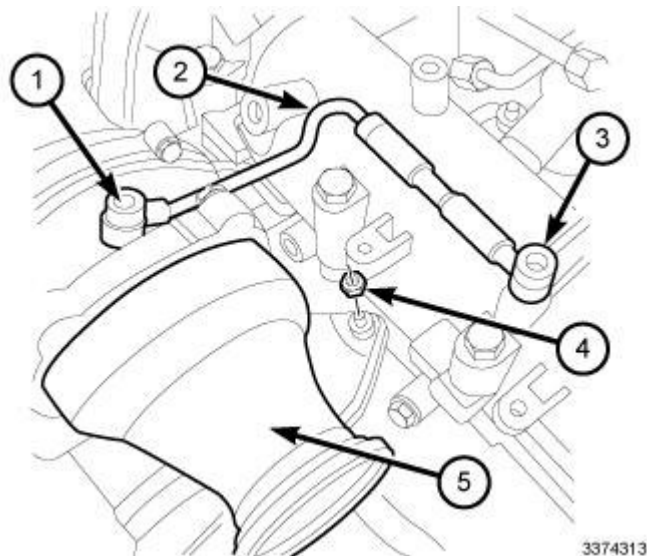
Turbocharger, Oil Supply Line & Fasteners
